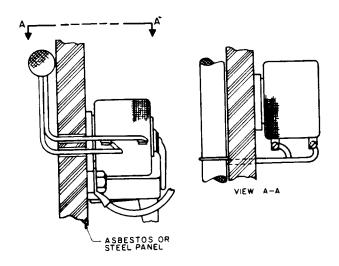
Contactors — KS-5323-01 and Similar Types — Wiring of Front-mounted and Connected, Rear-wired Potential Coils — No. 14 Gauge and Smaller Wires
